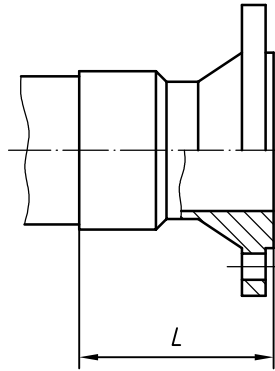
Fixed welding neck flange (FF/11)
